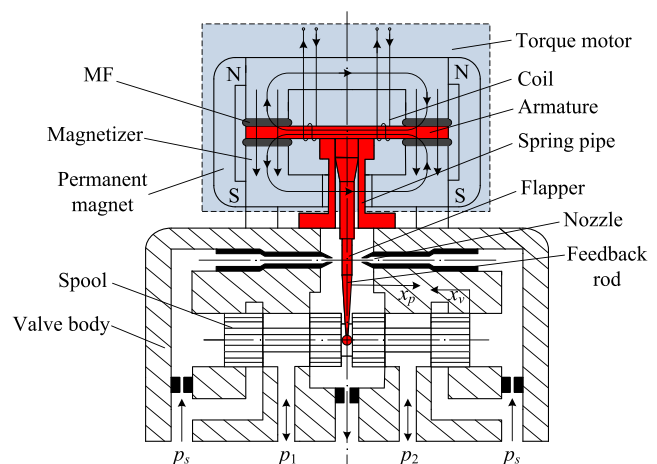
Construction of a hydraulic servo-valve with MF. The hydraulic servo-valve consists of two parts, the torque motor and two-stage hydraulic amplifier. The pilot stage is a nozzle-flapper valve while the power stage is a spool valve.
